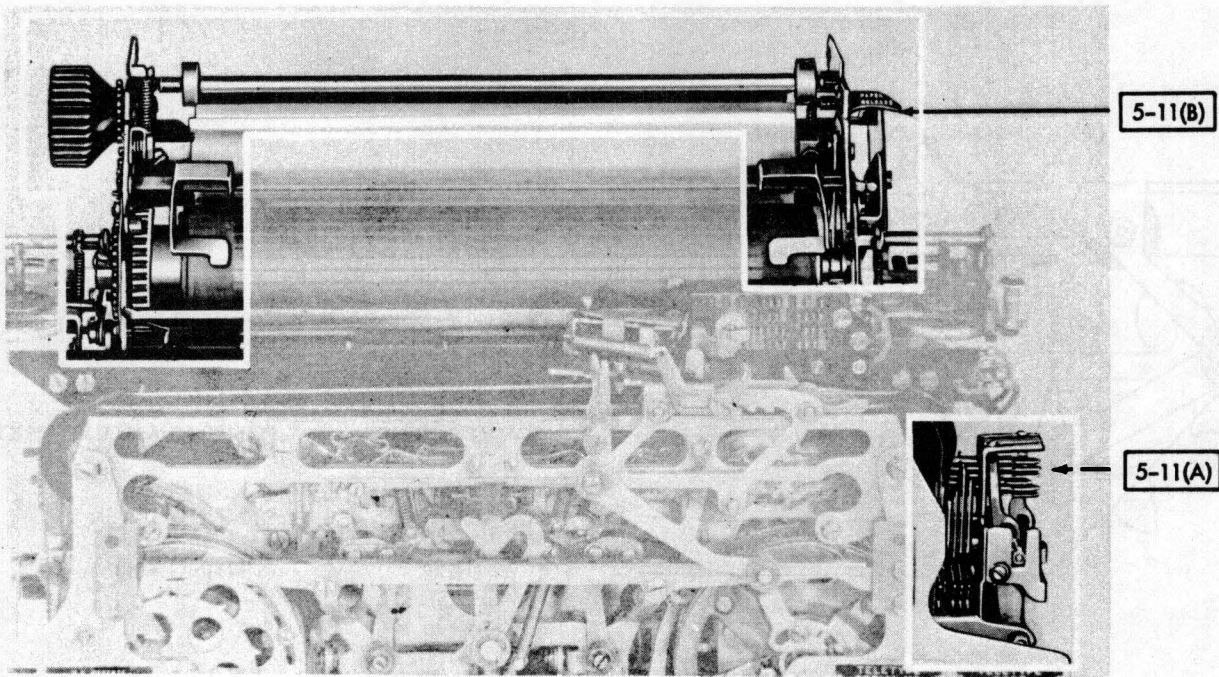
Automatic Typex Lubrication – Printing Mechanism and Type Box Carriage
